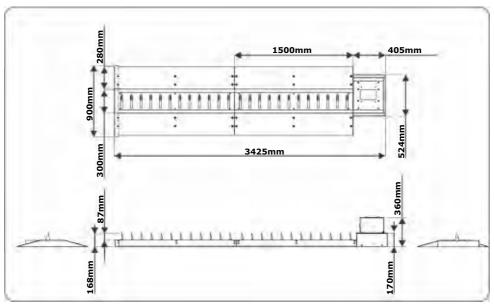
INDEPENDENT DRIVE SURFACE MOUNT CLAWS OVERALL DIMENSIONS
